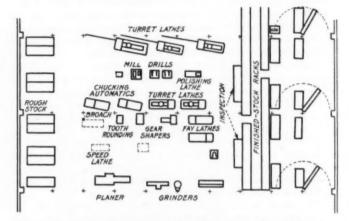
LAYOUT OF DEPARTMENT FOR MACHINING FEED-WORES PARTS
